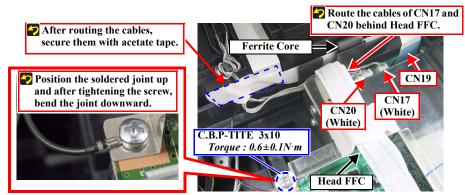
Disconnecting the cables and FFC (Scanner Unit)
